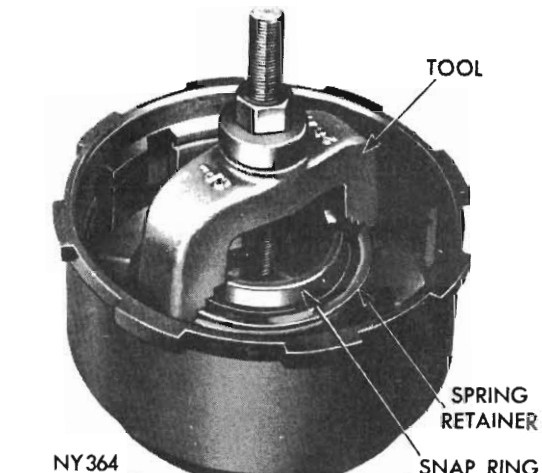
Removing or installing front clutch spring retainer snap ring (A-904)
